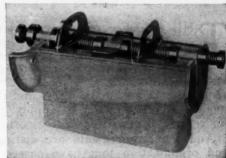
By the use of a jig, such as that depicted above, three babbit bearings can be cast at one setting.
